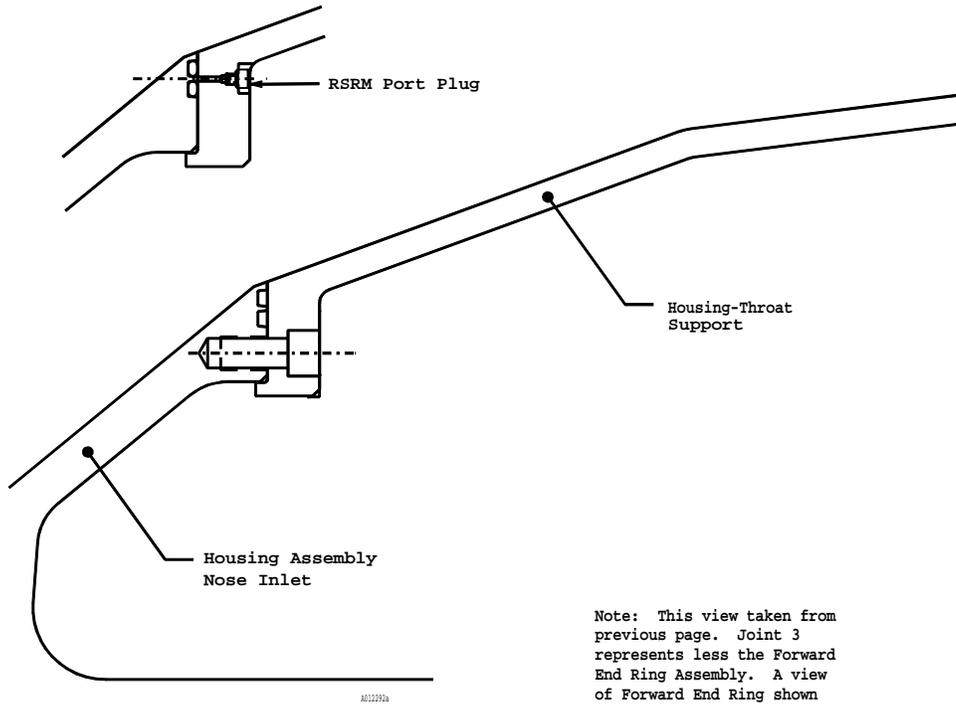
Nose Inlet-to-Throat-to-Forward Eng Ring Joint, Metal Components Location
